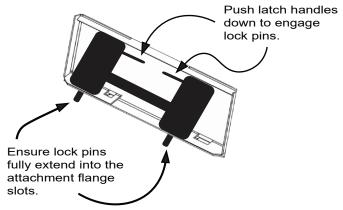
B QUICK ATTACH COUPLER LOCKED TO ATTACHMENT BRACKET
